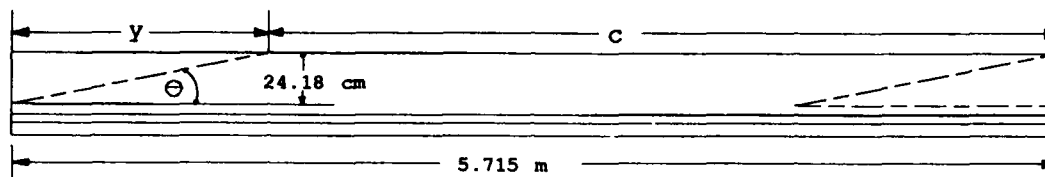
Angled cut required by the primary cutter — 5.715 *m* material
